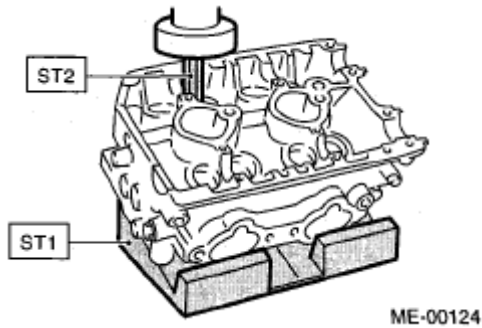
Identifying Valve Spring And Valve Using ST1 And ST2
